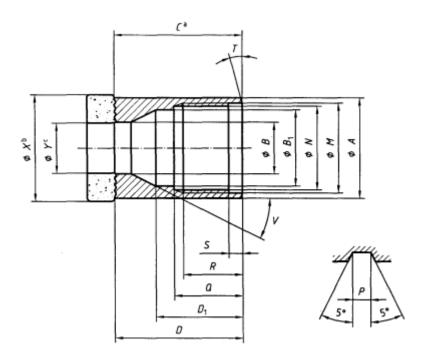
WIRELINE CORE BARREL ASSEMBLY
